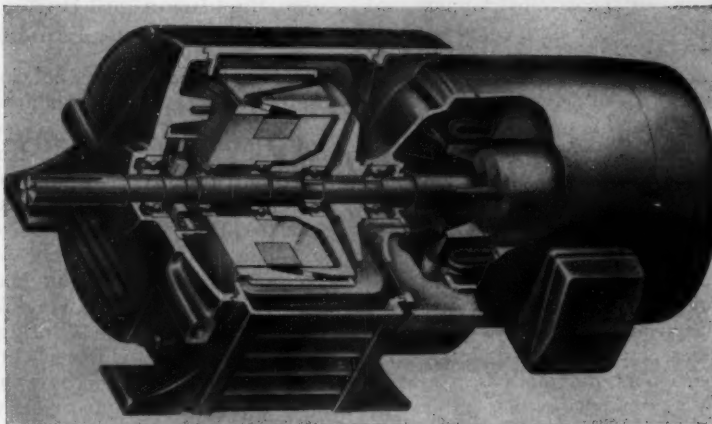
Cutaway of Kinatrol eddy-current coupling integrated-drive unit
